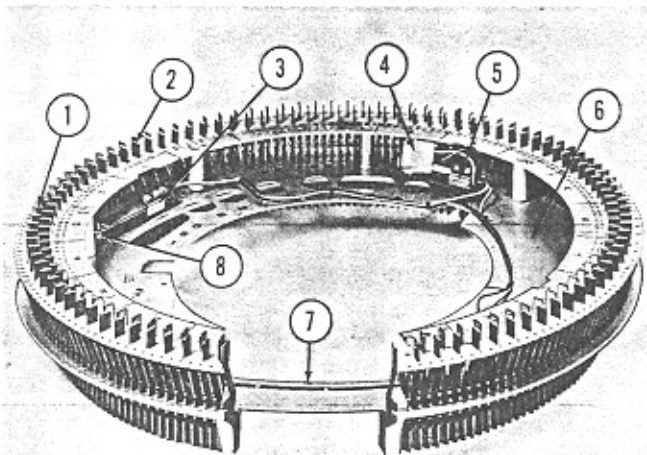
SELECTOR PLATE AND LATCH PIN ASSEMBLY
